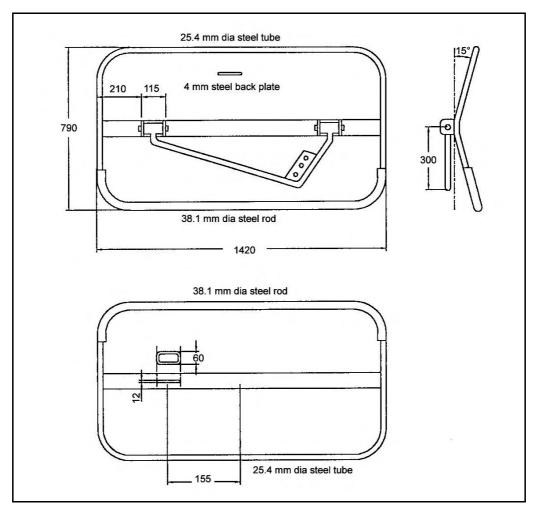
Design details of V-type otter boards (1420x790 mm; 80 kg each)
